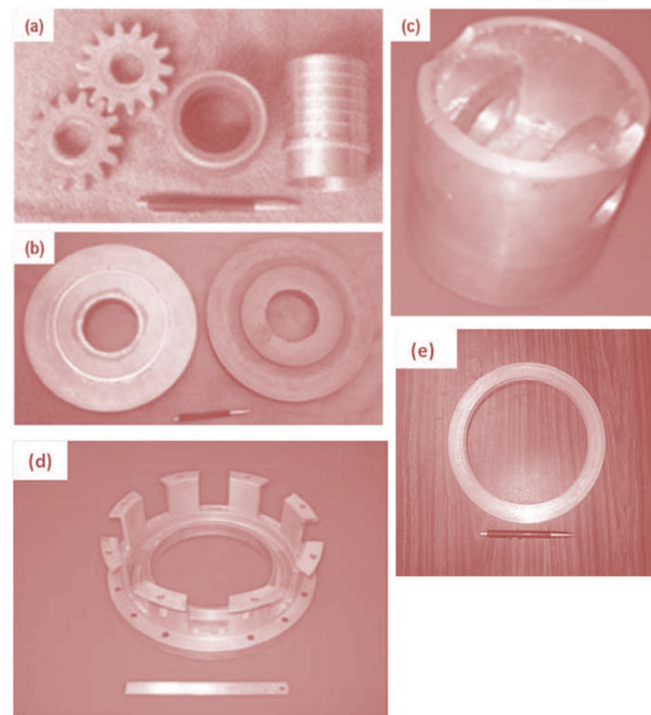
Functionally graded aluminium matrix composite prototype components at CSIR-NIIST (a) cylinder liners and gears (b) brake rotor disc (c) piston for engineering application (d) Al (356)-15%SiC metal matrix composite first gear housing and (e) piston ring processed by liquid metal stir casting and shaped by sand casting
